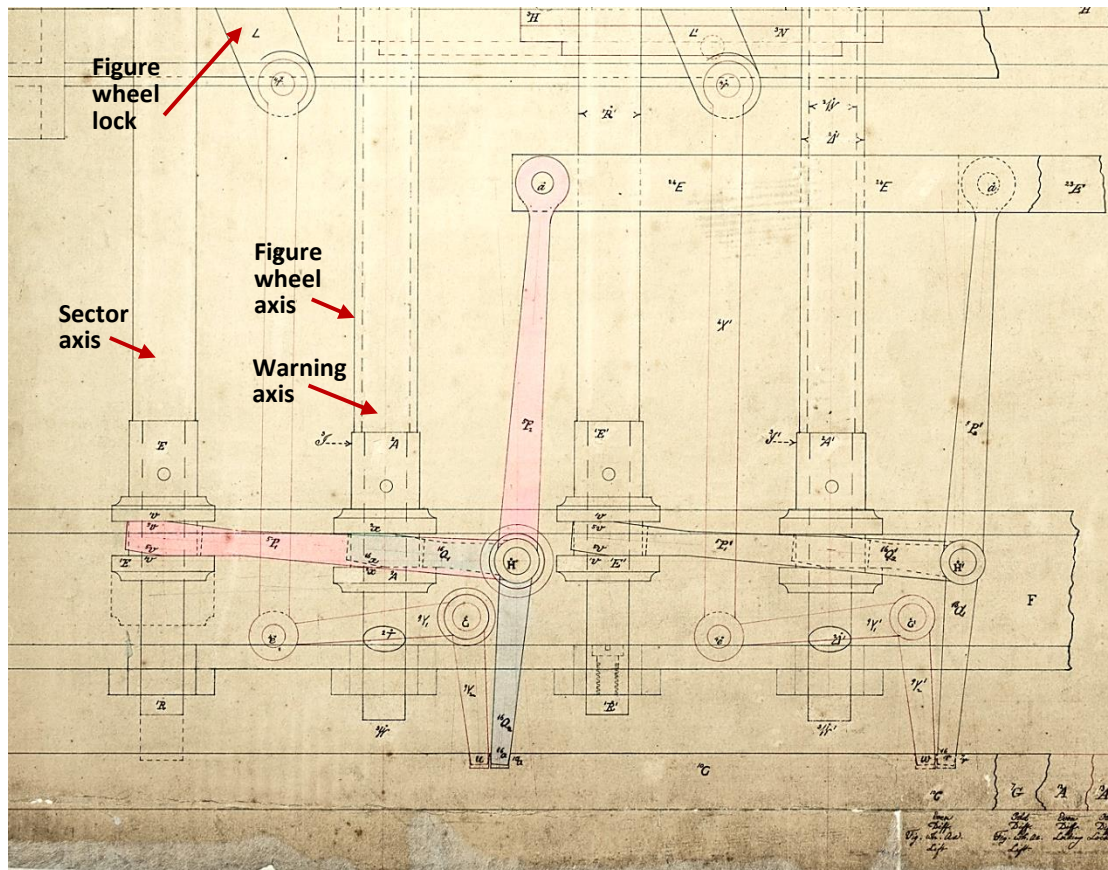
Bell cranks for axes and figure wheel locks (A/160) (detail) (colour added).
